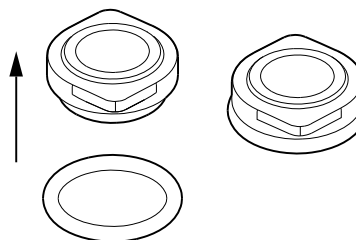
Fitting the O-ring on the stationary shaft seal part
